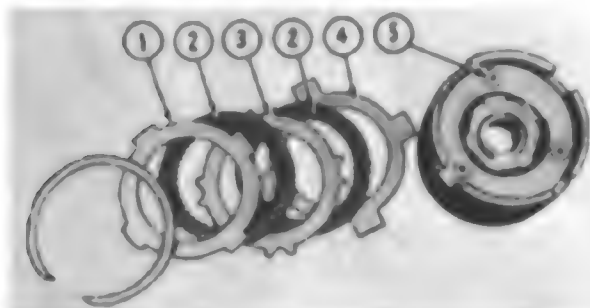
Components removed from TA side of torque amplifier clutch.
